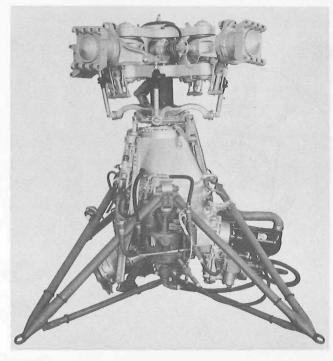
42. Main Gear Box and Rotor Quick Change Unit
